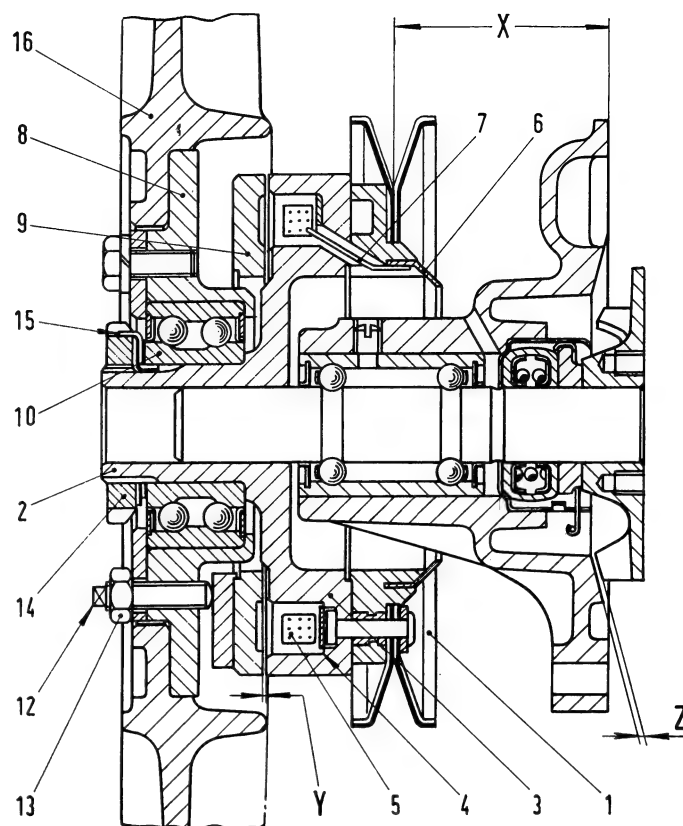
Sectional view of water pump and automatic in-and-out fan assembly (engine 118 C.000).
